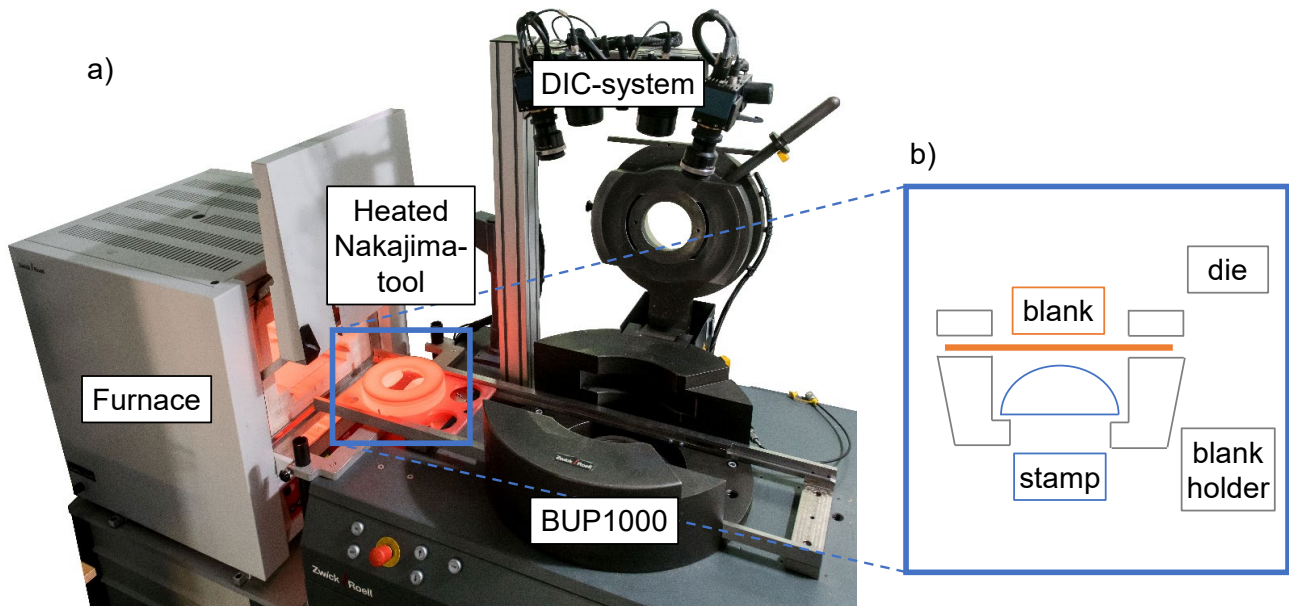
a) Furnace test bench for high temperature forming on a BUP1000 sheet metal forming testing machine using the example of a test with a steel specimen; b) Schematic sketch of the heated Nakajima tool
